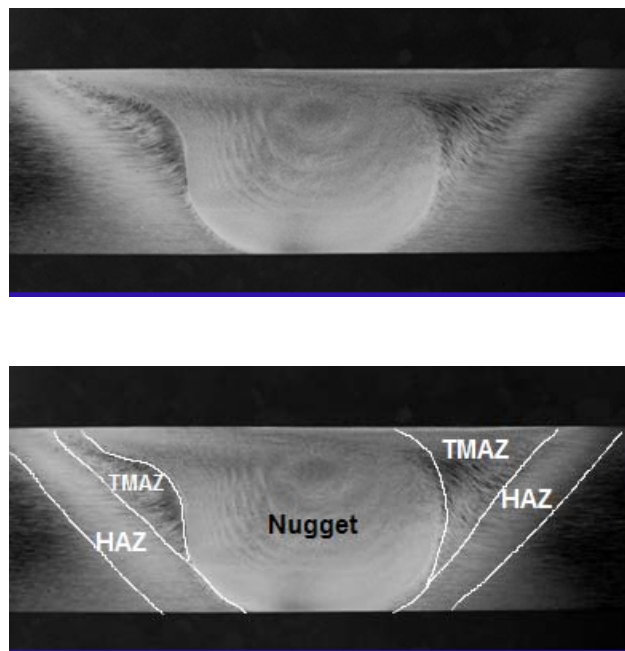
Cross section of typical friction stir weld. Top photo shows weld cross section without markup. Lower photo is same photo marked up to show temperature zones.
